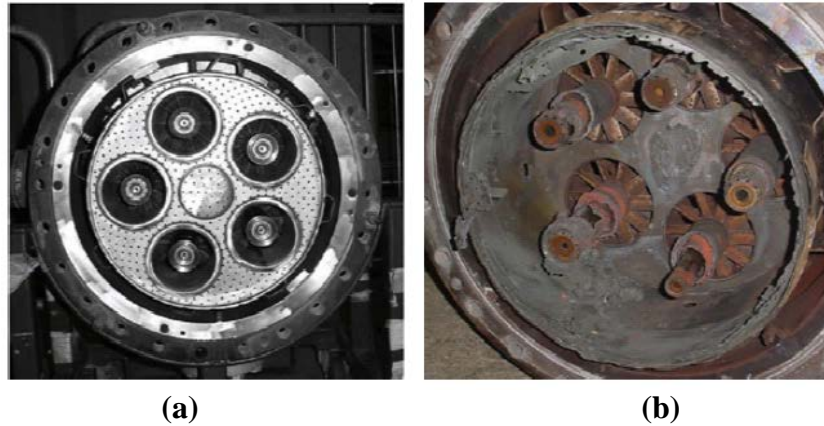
Combustor components from a burner assembly showing (a) New assembly, and (b) Destroyed assembly. Images reproduced from Ref. [1].
